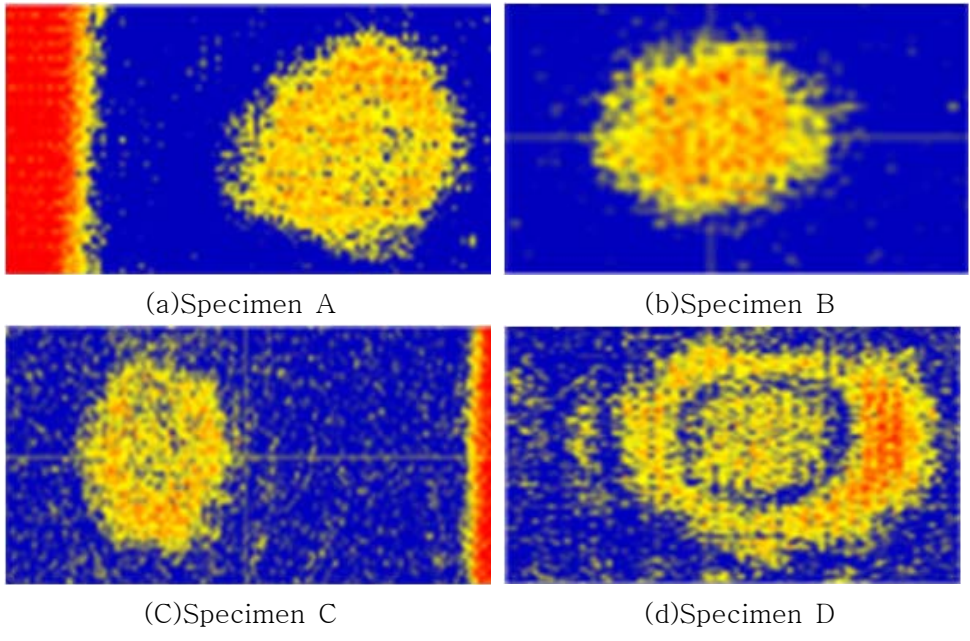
Image inspection result of spot welding specimen A,B,C,D
